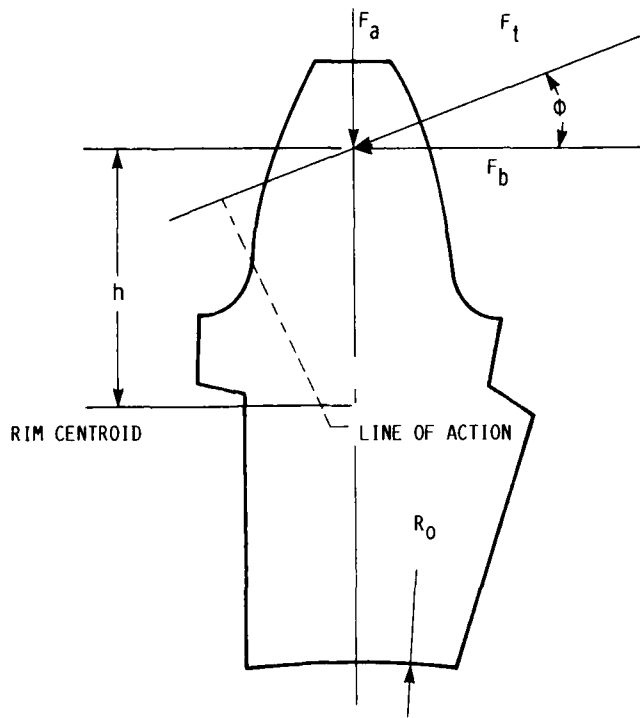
A SINGLE TOOTH FROM A 24 TOOTH GEAR WITH A RIM.
